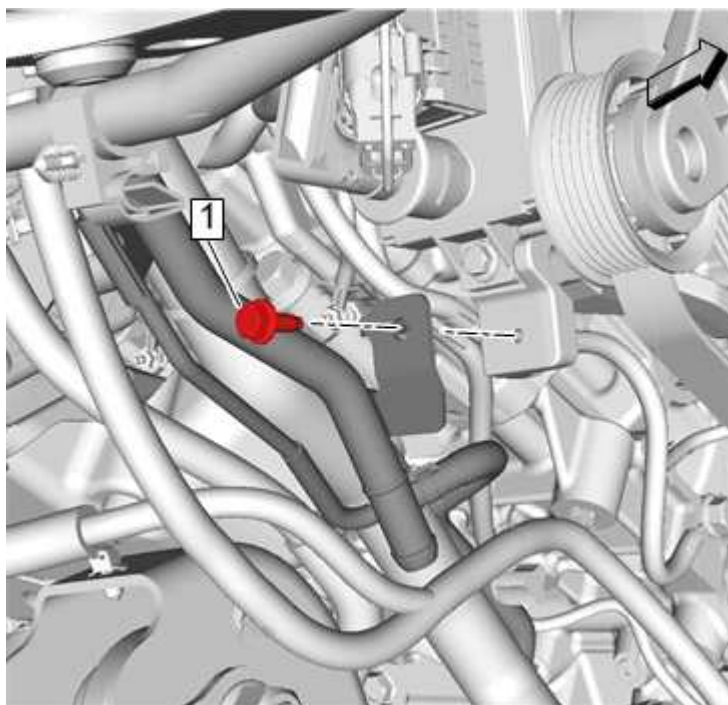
Heater Outlet Pipe Retainer Bolt And Generator Bracket
